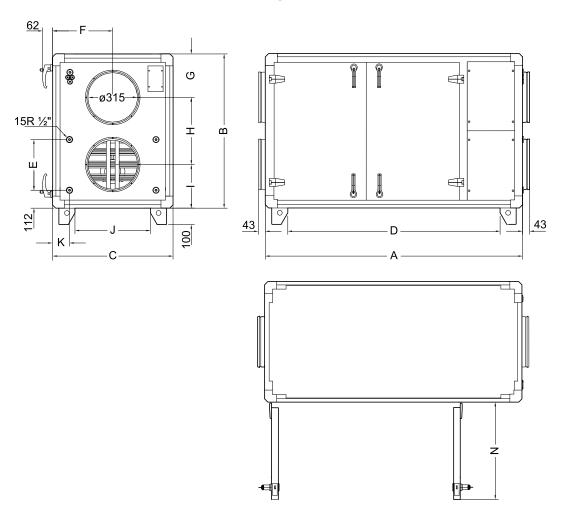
Dimensions (mm) Topvex SX03 (drawn as right hand unit)
